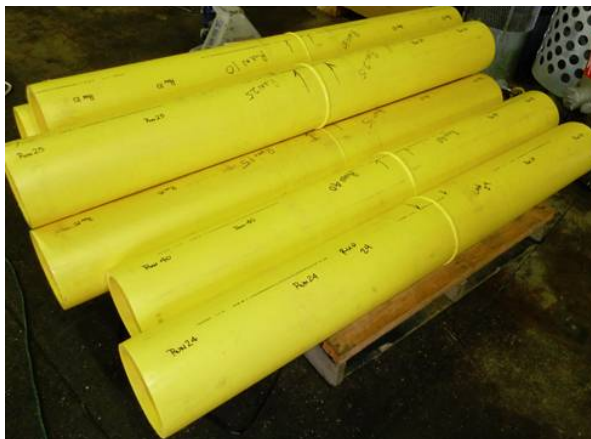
Butt Fusion Joint Samples Fabricated at Extremes of Acceptable Fabrication Parameters
